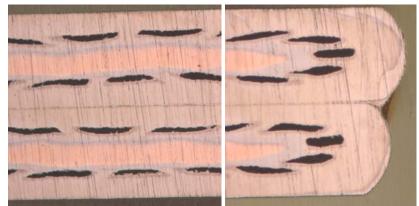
Cross section of a joint. Stiffer springs increase the pressing force which reduces the layer of soldering tin effectively.
